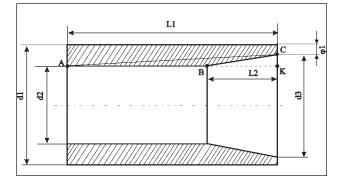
Longitudinal section of the bushing: L1 – bushing length; L2 - the depth of the inner tapered surface bore of the bushing; d1 - the outer diameter of the bushing; d2 - the inner diameter of the bushing; d3 - large inner diameter of the bushing after boring; γ - the minimum possible wall thickness of the bushing from the condition of collapse
